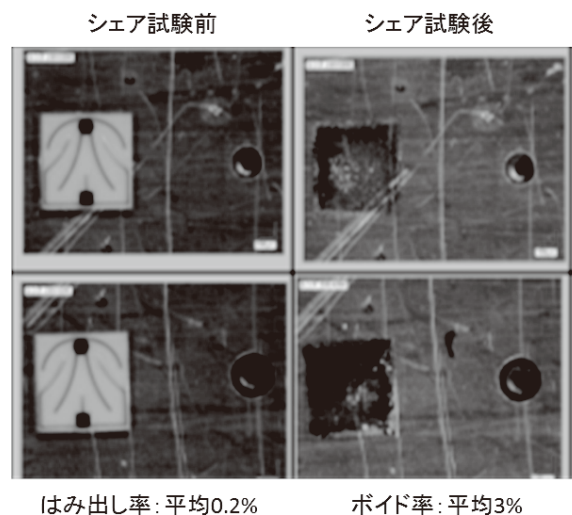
Optical microscope photos of pastes printed with a die-bonder and LED chips mounted on the pastes. Before shear strength test (left side of each photo) and after test (right side of each photo).
